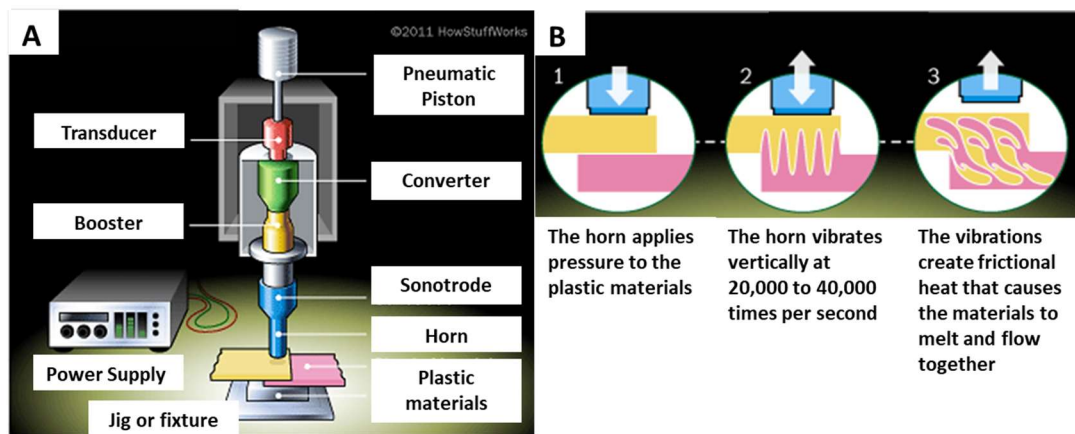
11. Ultrasonic welding process schematic diagram. A. The ultrasonic welding equipment is represented by identifying the main parts and B. The ultrasonic welding process is represented in three steps (numbered 1 to 3), where the blue tip represents the sonotrode/horn, the white arrow the pressure applied direction and the orange and pink parts are the plastic parts being welded. Adapted from (Freudenrich 2011)
